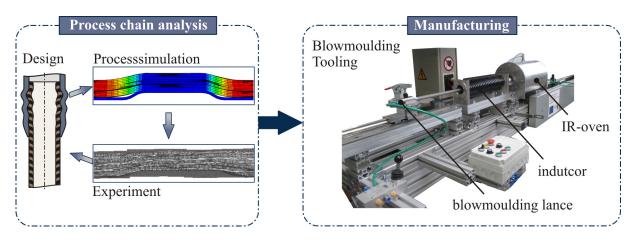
Holistic process analysis of the blow moulding process (left) and integral blowmoulding tooling (right)
